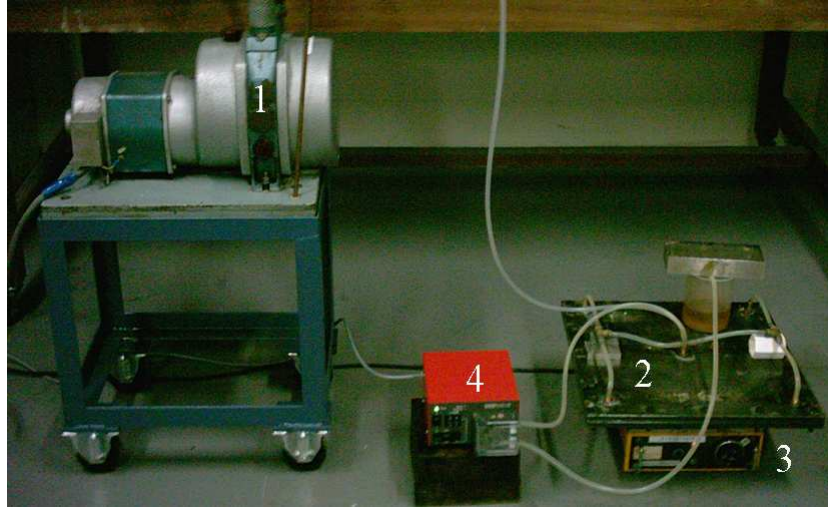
Illustration of the vacuum assisted resin transfer moulding.
